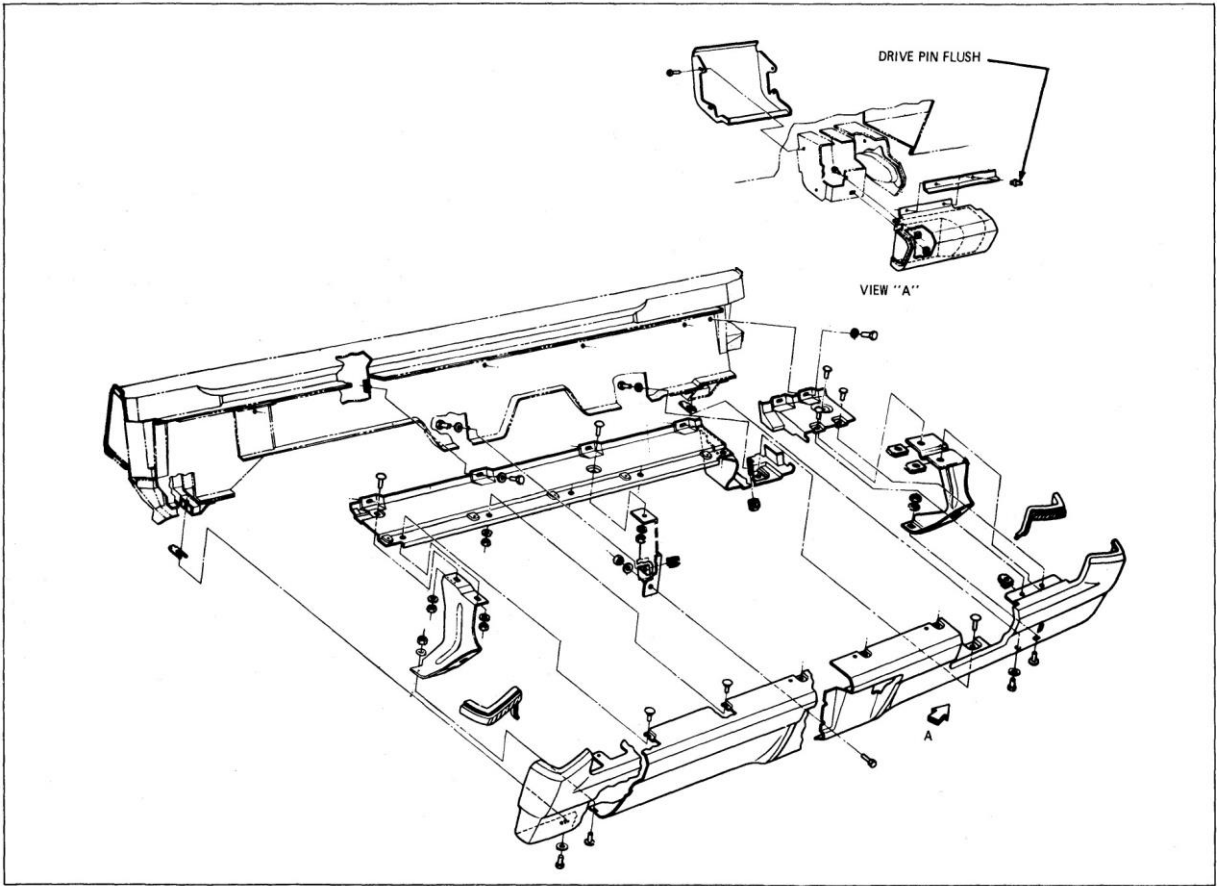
Pontiac Station Wagon Rear Bumper Assembly
